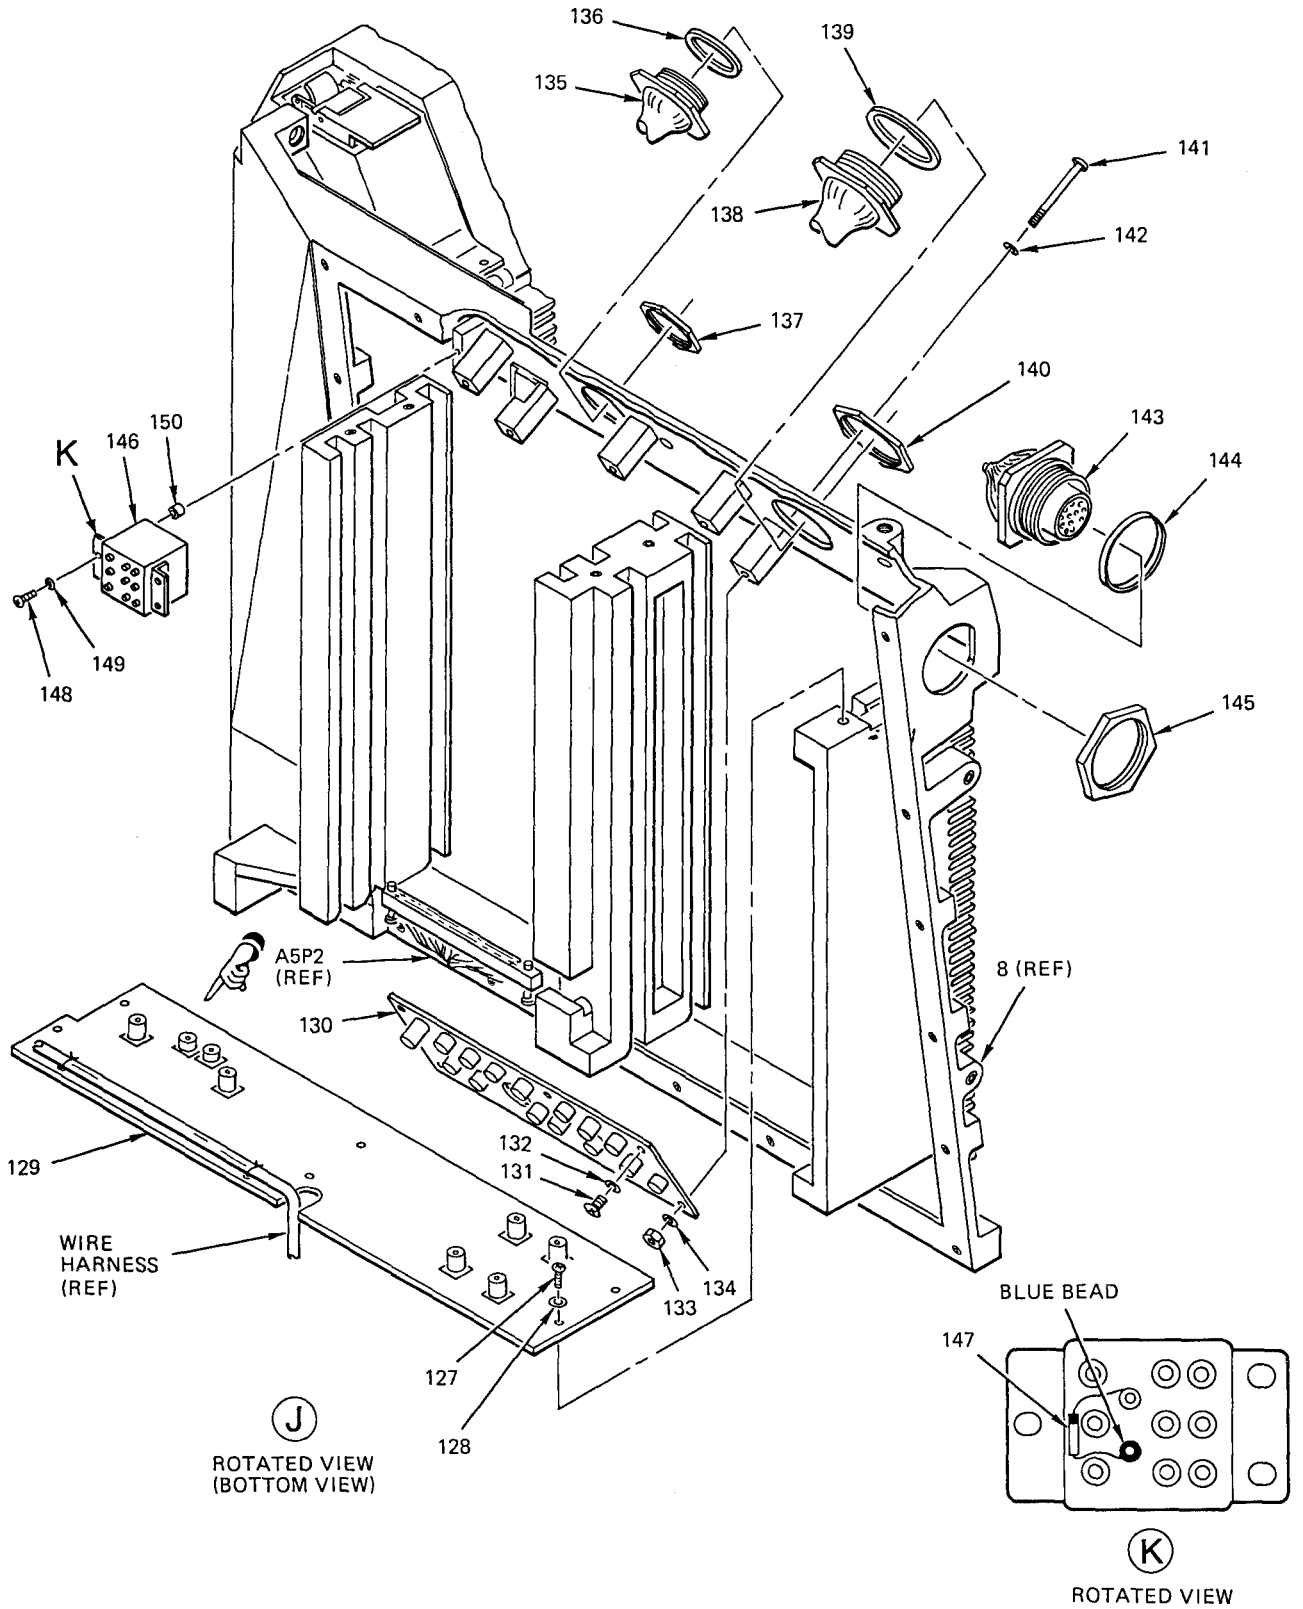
Power Supply Subassembly Exploded View (Sheet 4 of 6)
